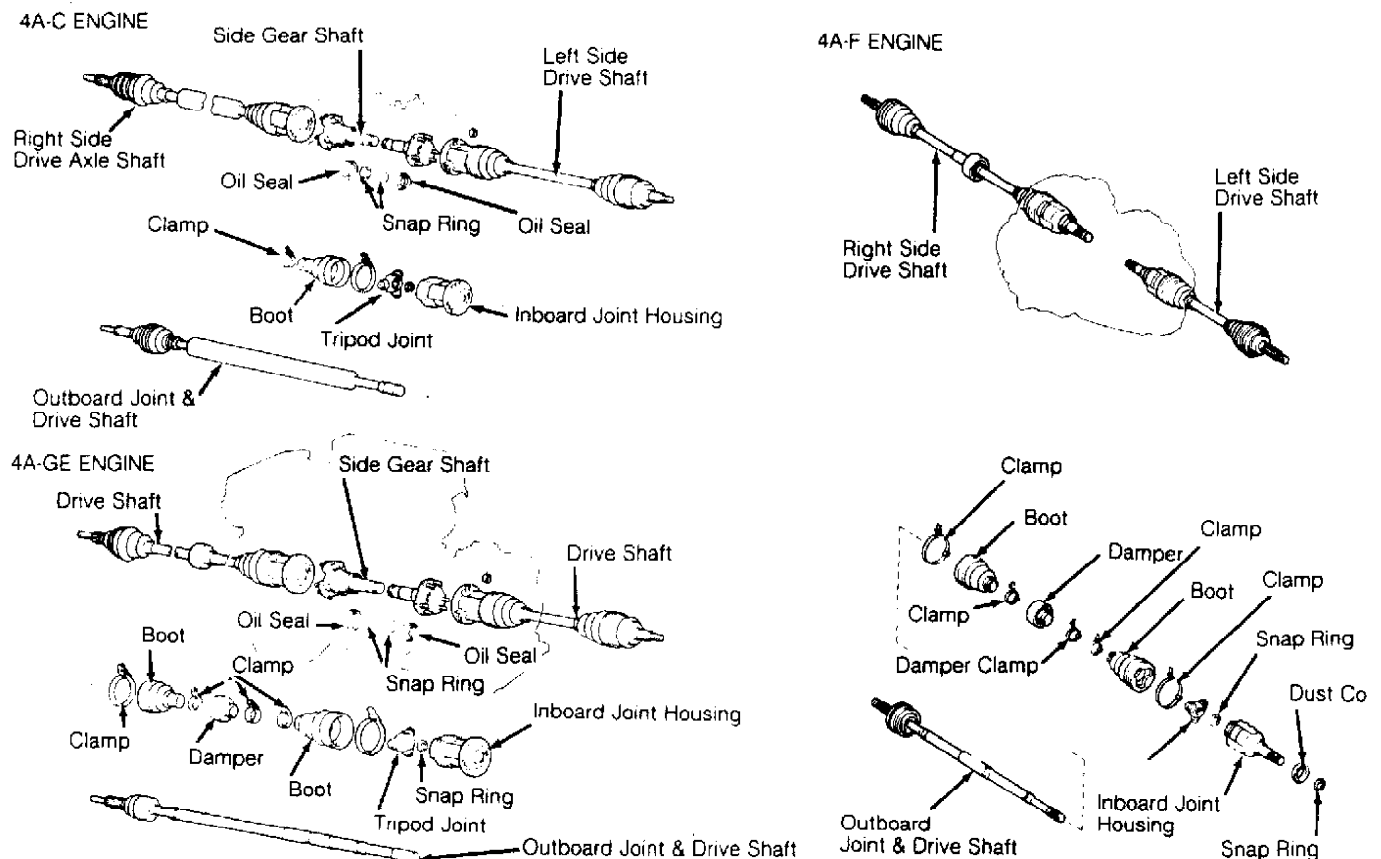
Exploded View of Corolla & FX Drive Axle Shafts
